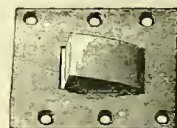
HEAD-BOARD BUSHINGS.
